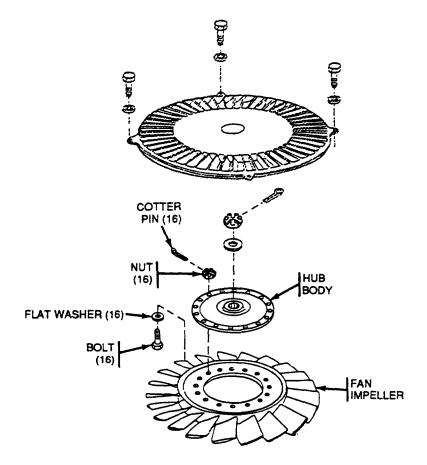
Engine cooing fan assembly disassembly and assembly.
